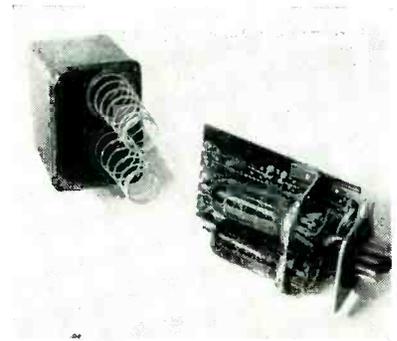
Mounting board and tube chassis. Terminals are placed on board depending on type of circuit being wired
